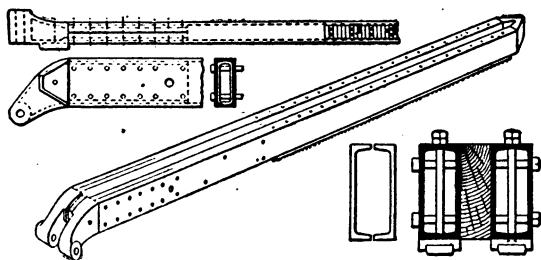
Dipper Handle Formed of Two Rivetless Steel Boxes.
